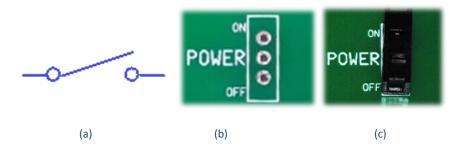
Slide switch symbol (a), silk screen drawing (b) and placement (c) in the power position.
